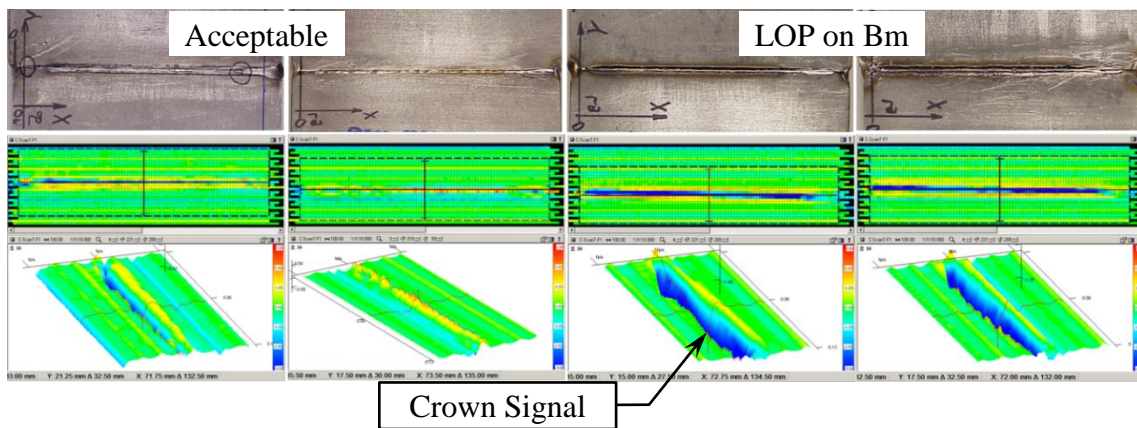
Weld Specimen A-sc (left) and T-sc (right).
